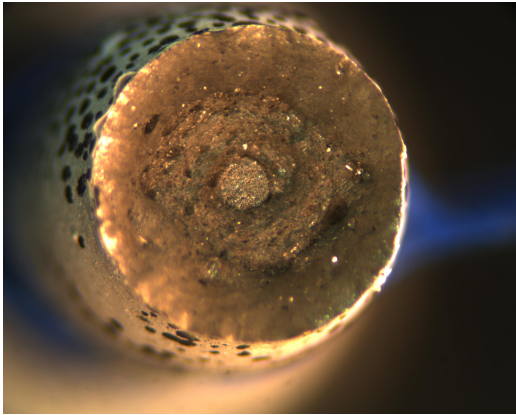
Optical microscope images of fracture surfaces of 316L tested specimens. Prior to testing specimen diameter 6.35 mm.
